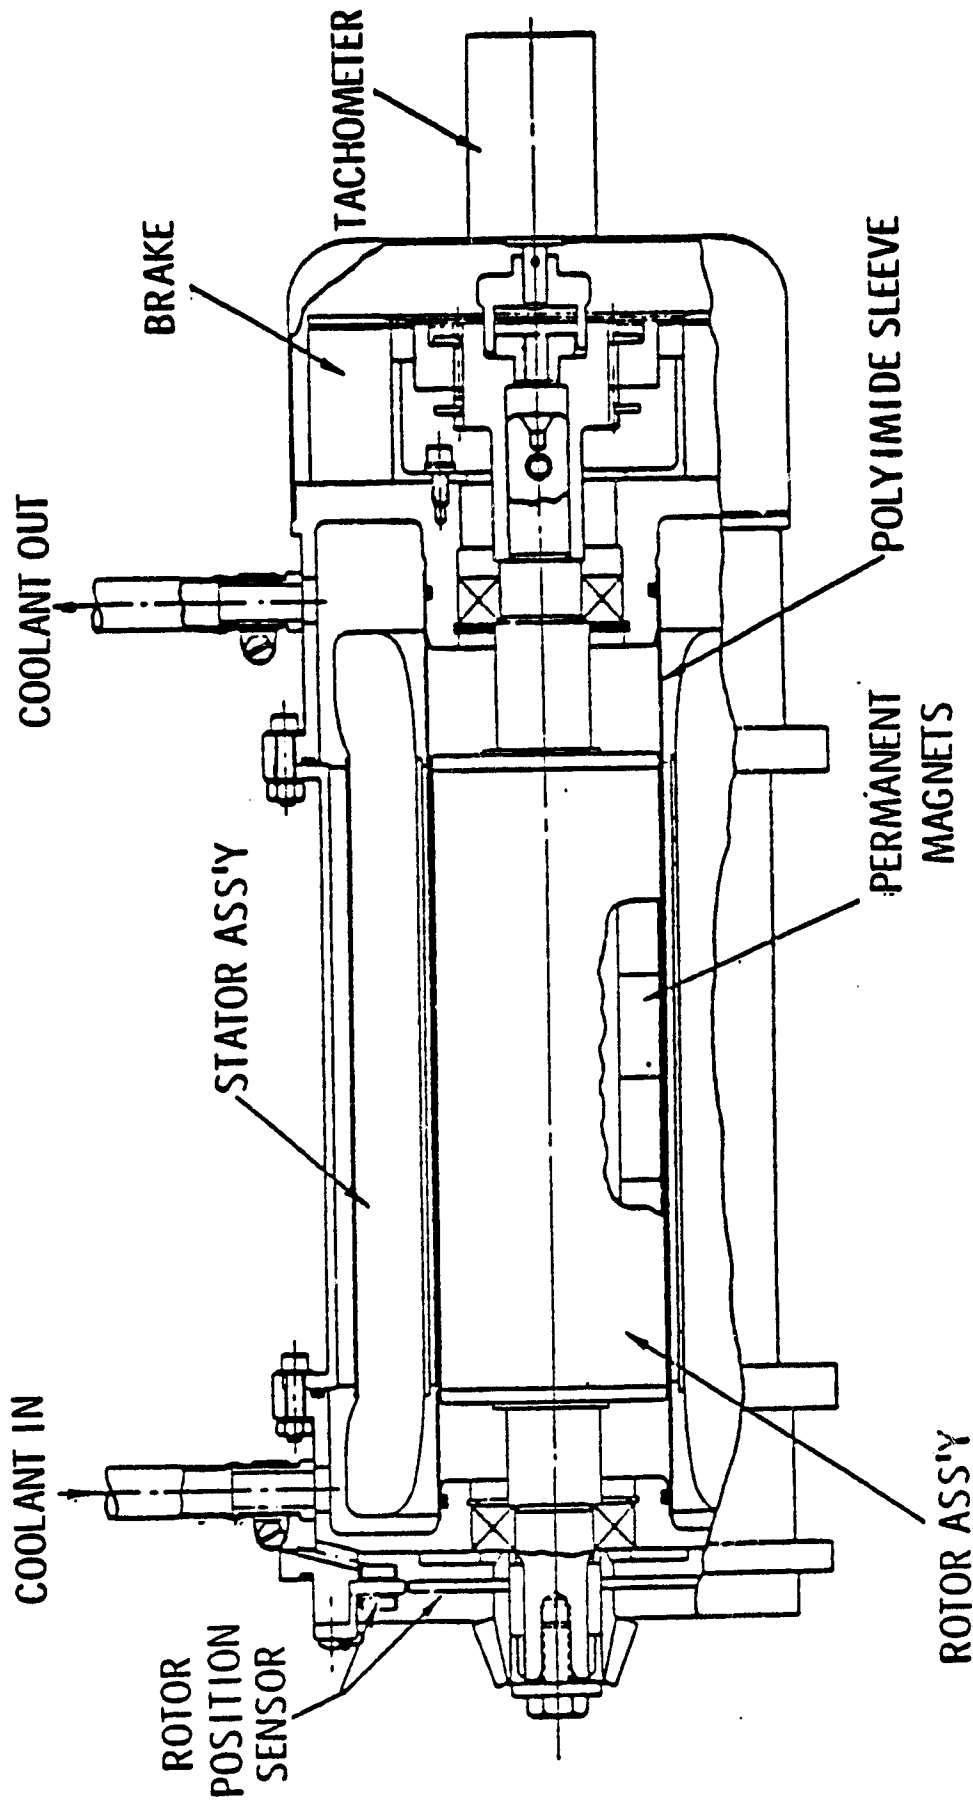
Cross Sectional View of the EMA Motor Along the Rotor Axis
